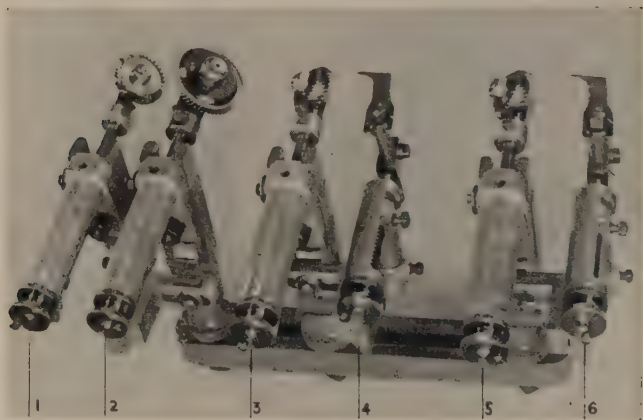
Arrangement for double plush with single backing: (1) plush feeder; (2) clearing bur; (3) sinker bur; (4) presser; (5) sinker bur; (6) presser.
